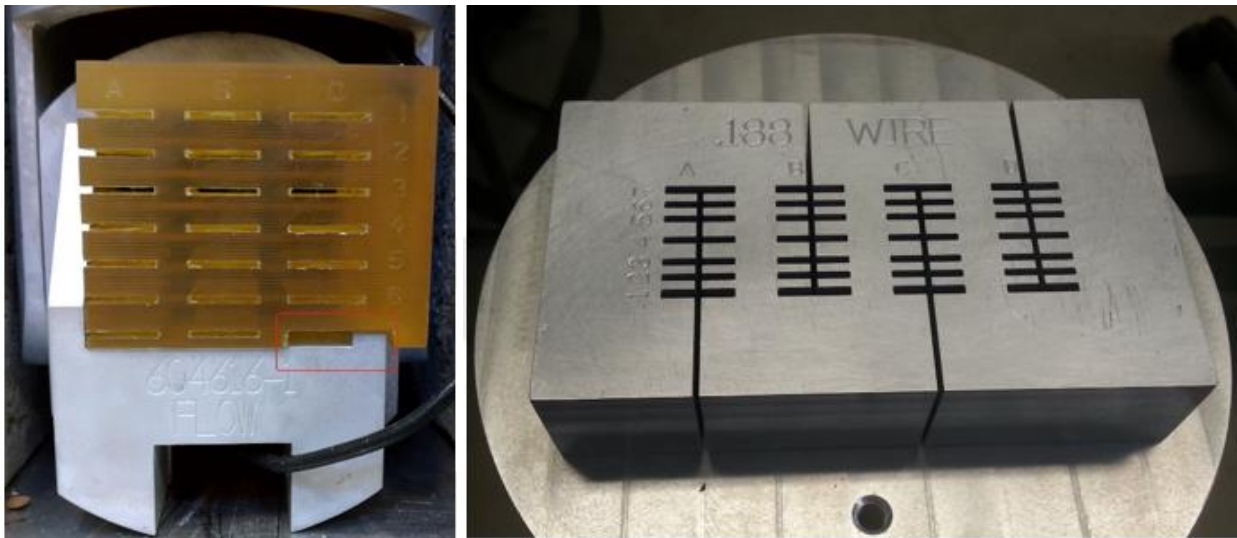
Example 3D printed (left) and wire-EDM (right) CGP guide blocks.
